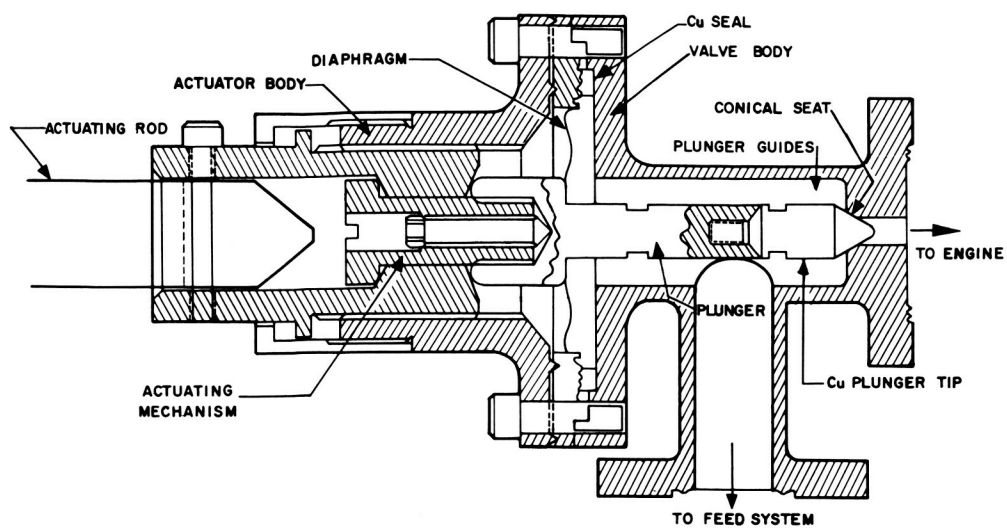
MANUALLY OPERATED CESIUM VALVE
